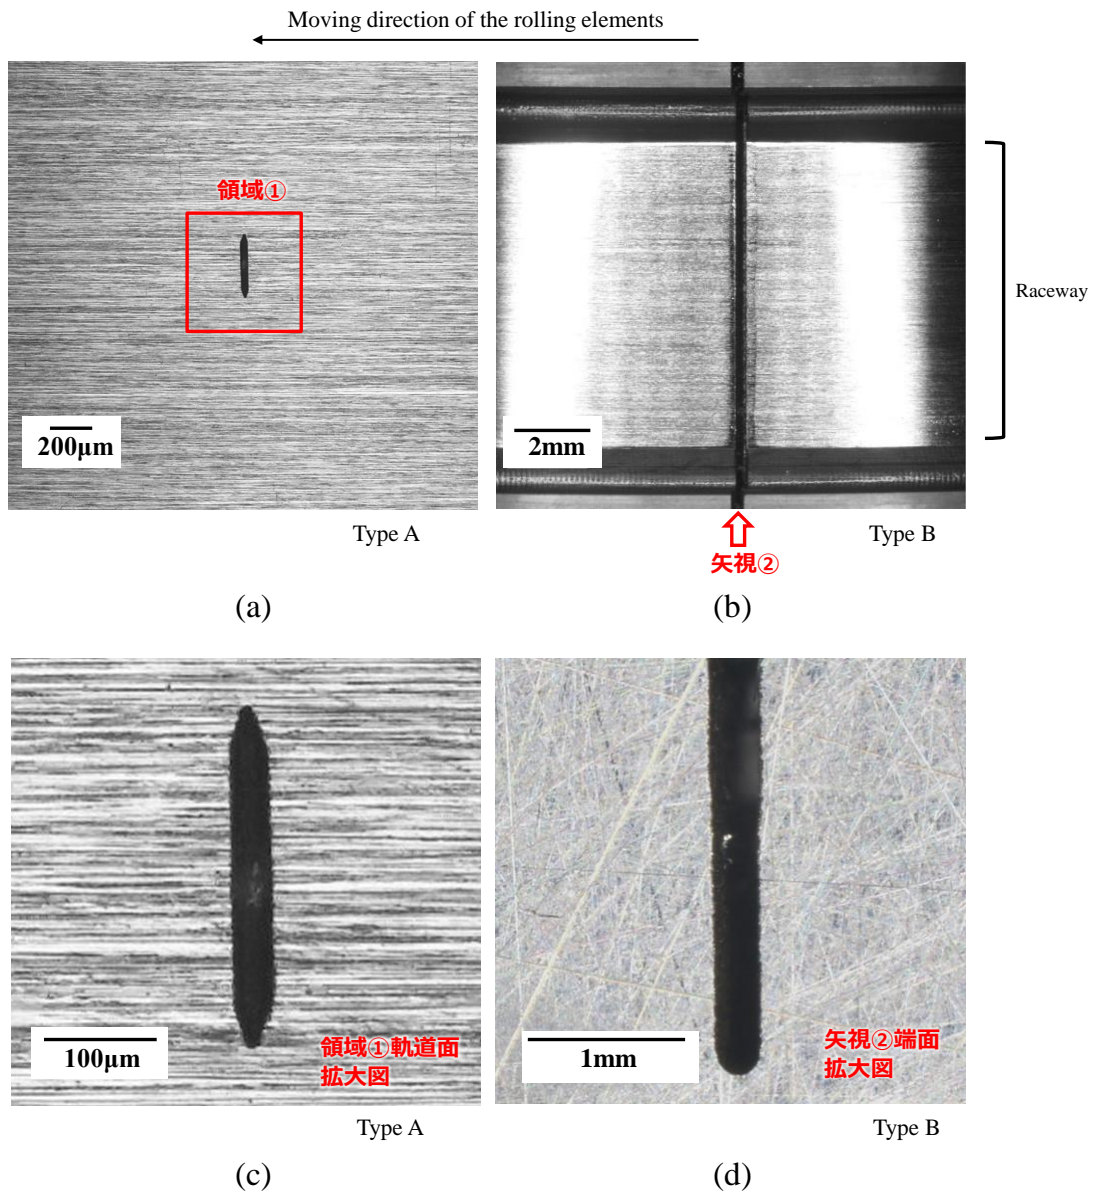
Pictures of the Type A defect and Type B defect: (a) the Type A defect, (b) the Type B defect, (c) a magnified image of the Type A defect, (d) a magnified image of the Type B defect.
